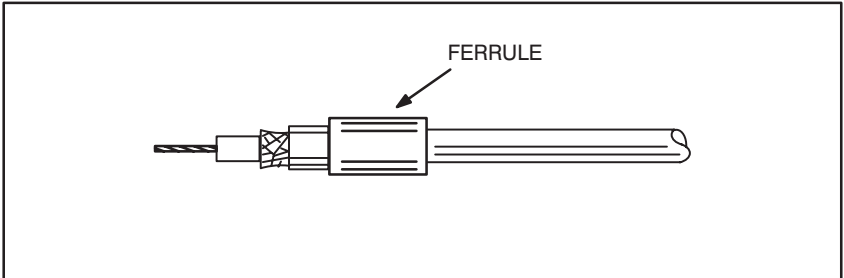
Slide Ferrule onto RG-11/U Cable
